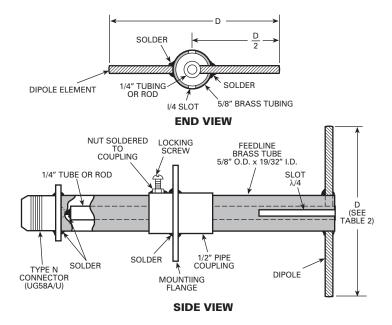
TWO VIEWS OF THE DIPOLE AND FEEDLINE construction details. In the end veiw drawing note that the right dipole element connects to the inner and outer tubes and shorts them together. The left dipole element connects just to the outside tube. The ends of both dipole elements are equi-distant from the center of the inner tube.
